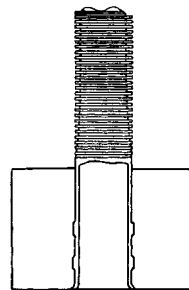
Integrally finned tube rolled into tube sheet with double serrations and flared inlet. (Woverine Division, UOP, Inc.)
